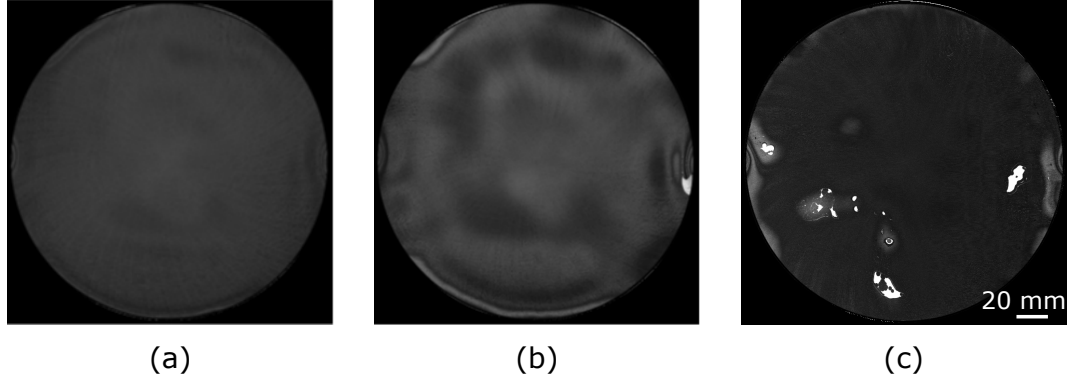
Examples of SAM c-scan images of 200 mm polymer bonded stacks. (a) Defect free bonding interface (b) Edge defects at the clamp location (c) Major defects due to the dewetting of the glue layer
